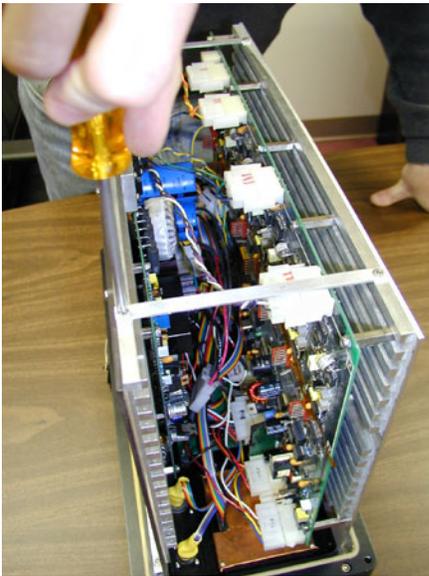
Unscrew two screws holding the bars to the transmitter board on the left side.
